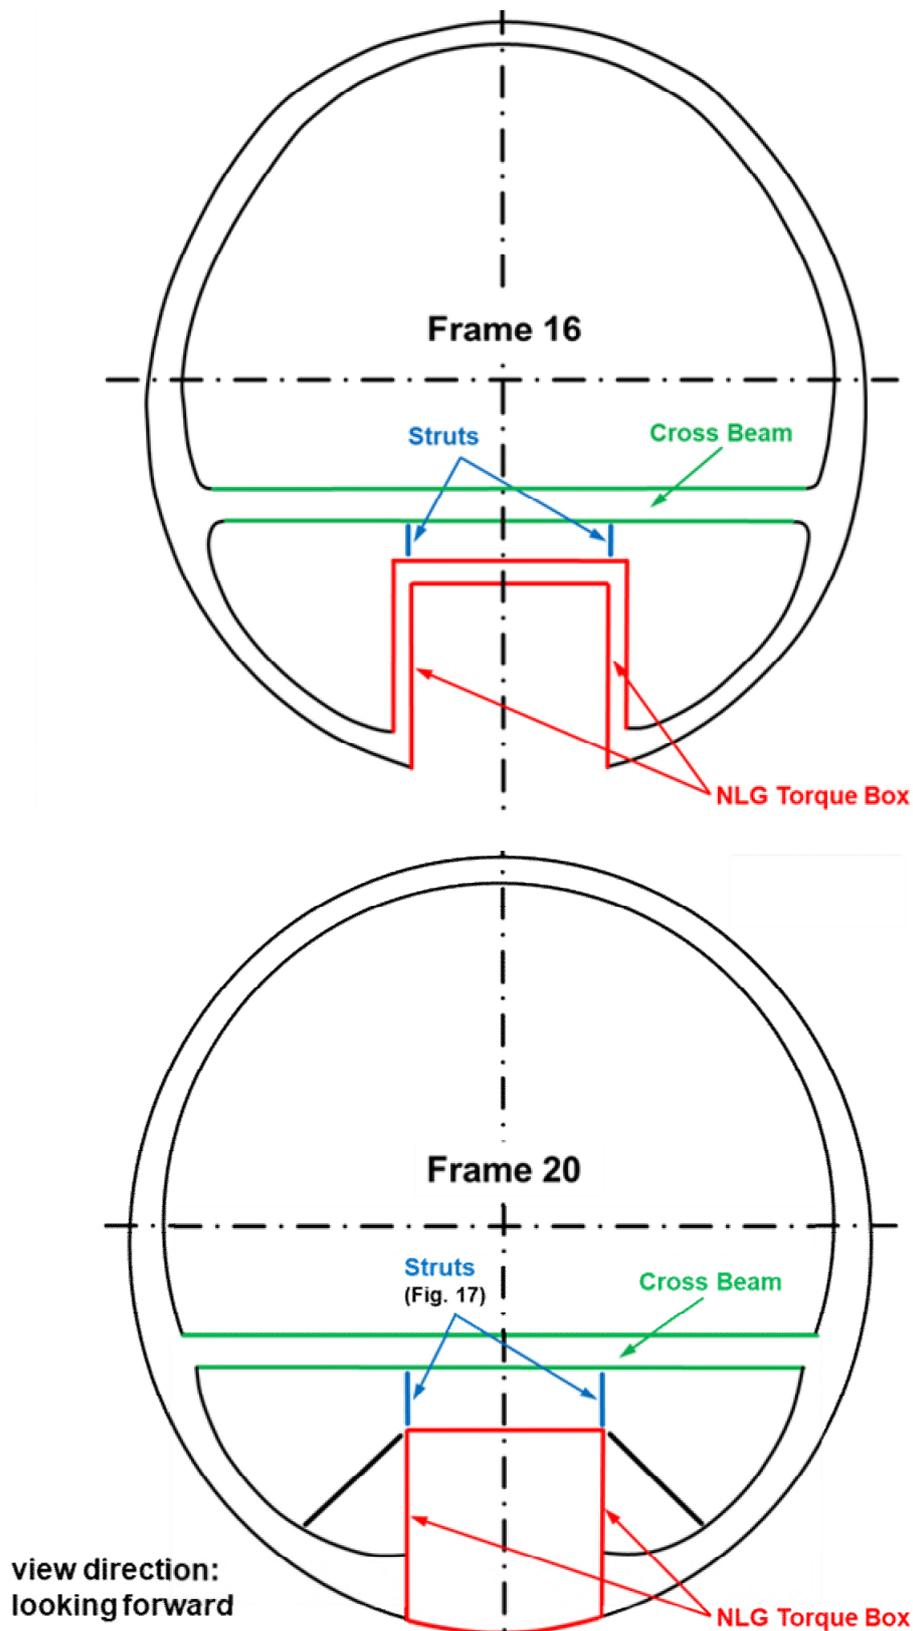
Sketch of the fuselage cross section at Frame 16 and Frame 20
